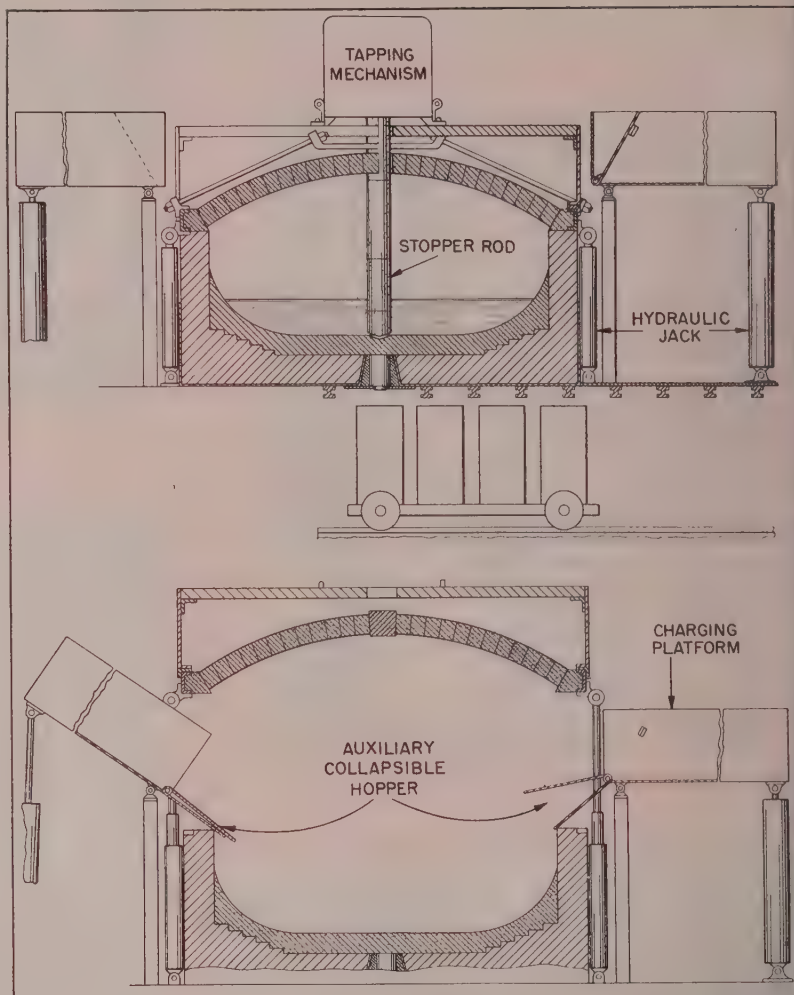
(top)—Cross section through furnace showing movable roof section in working position and with tapping rigging lowered into place through roof
